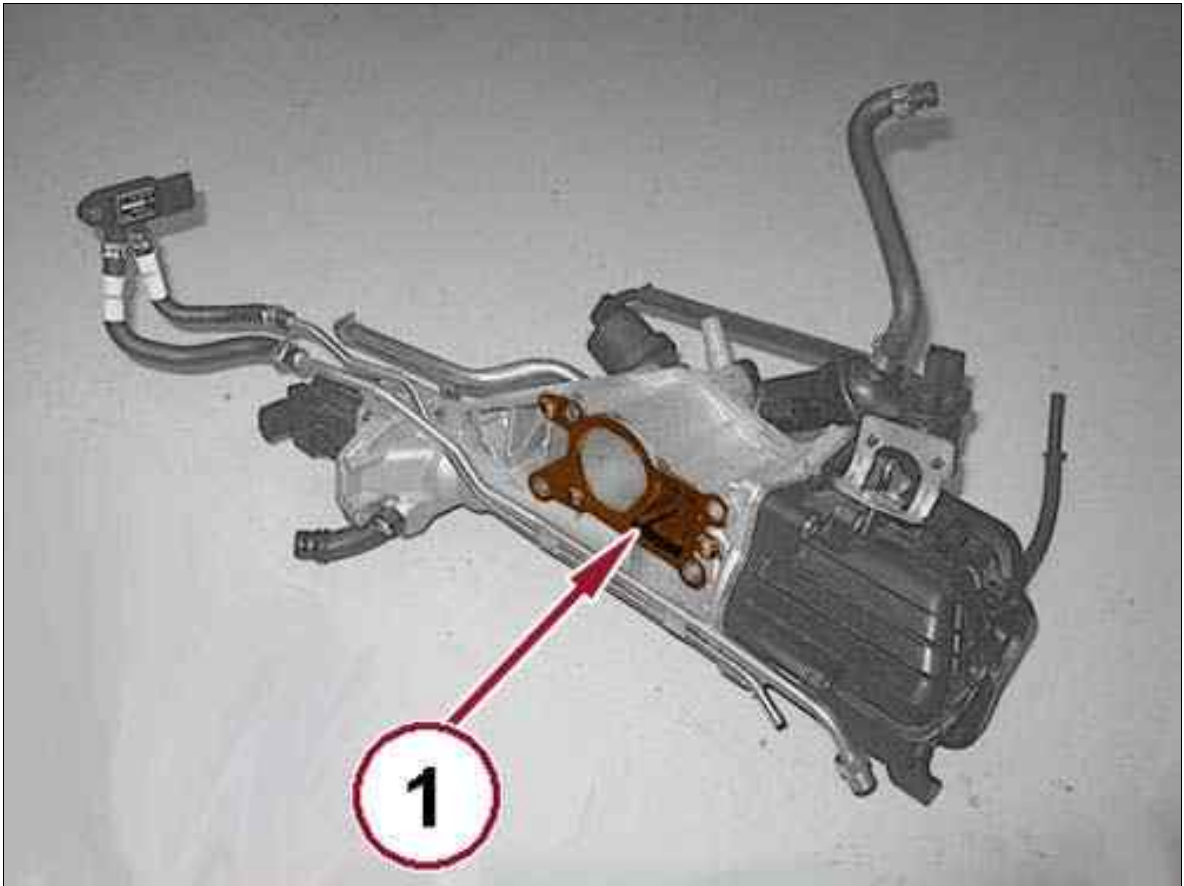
EGR Valve Connecting Hoses, Screws & Nuts
